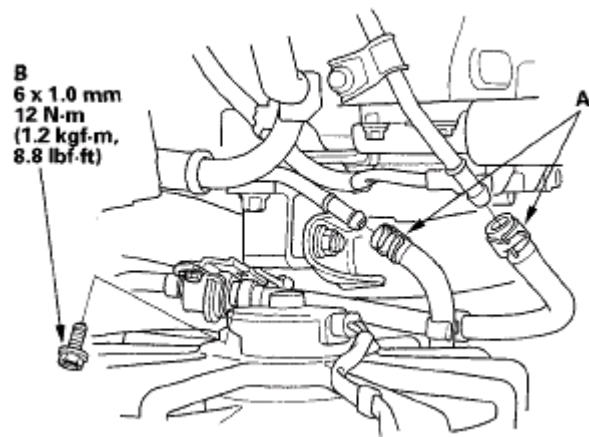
Identifying ATF Filter Mounting Bolt And Automatic Transmission Fluid (ATF) Cooler Hoses
